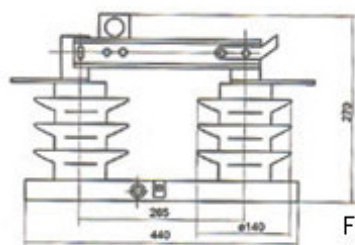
GW9-10 (W) 400 overall / 600 Dimension
